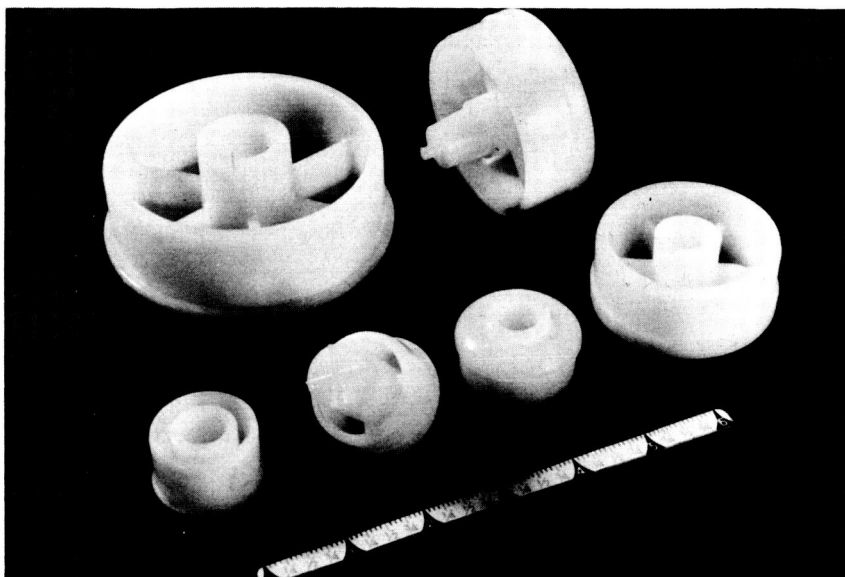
Conveyor roller end caps of duPont zytel nylon molded resin.
